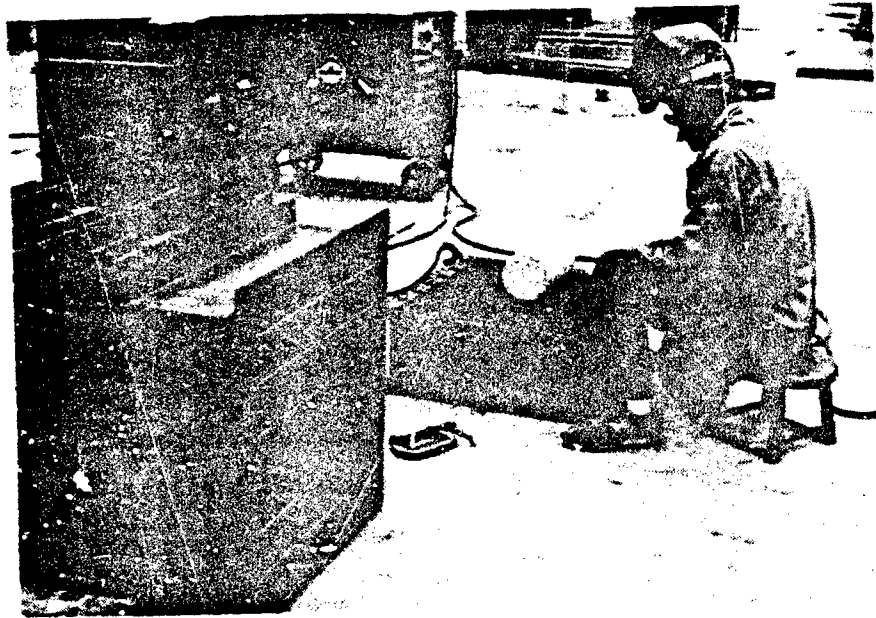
Welding Wire Mesh to Bottom of Frame, Experiments 4180 and 4185.
